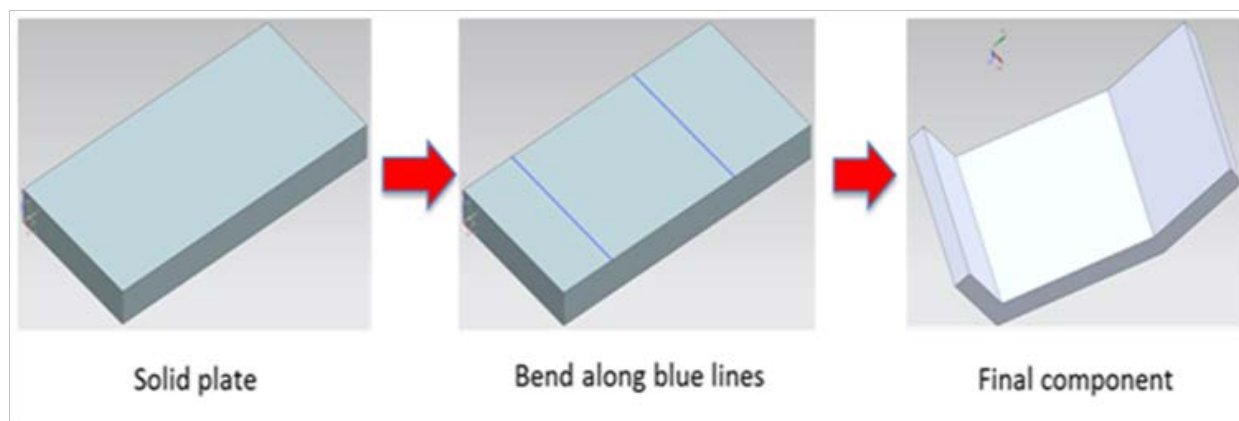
Manufacture of Half Side Component of V-Hull Assembly
